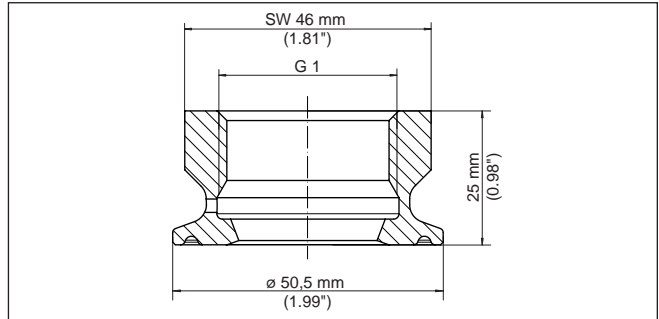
Dimensions hygienic adapter G1 (DIN 3852-X) on Clamp 1½" (DIN 32676, ISO 2852) PN 40 - Cone seal
